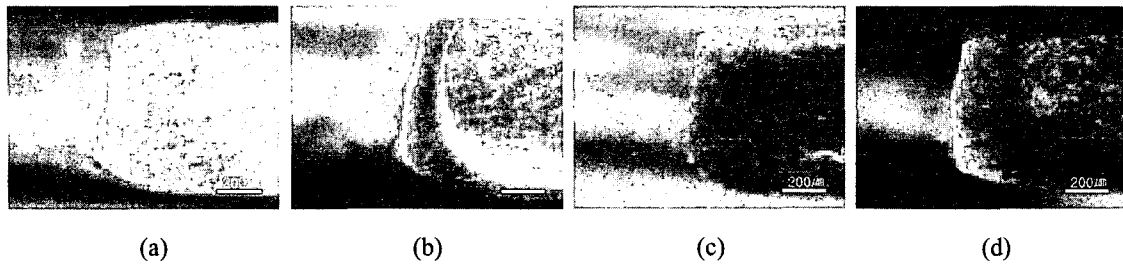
6. Profile of the punched holes formed by hydro-mechanical punching process. Thickness of the sheet is 1mm, Diameter of half piercing punch is 12.06mm. Diameter of cutting die is 12.10mm
